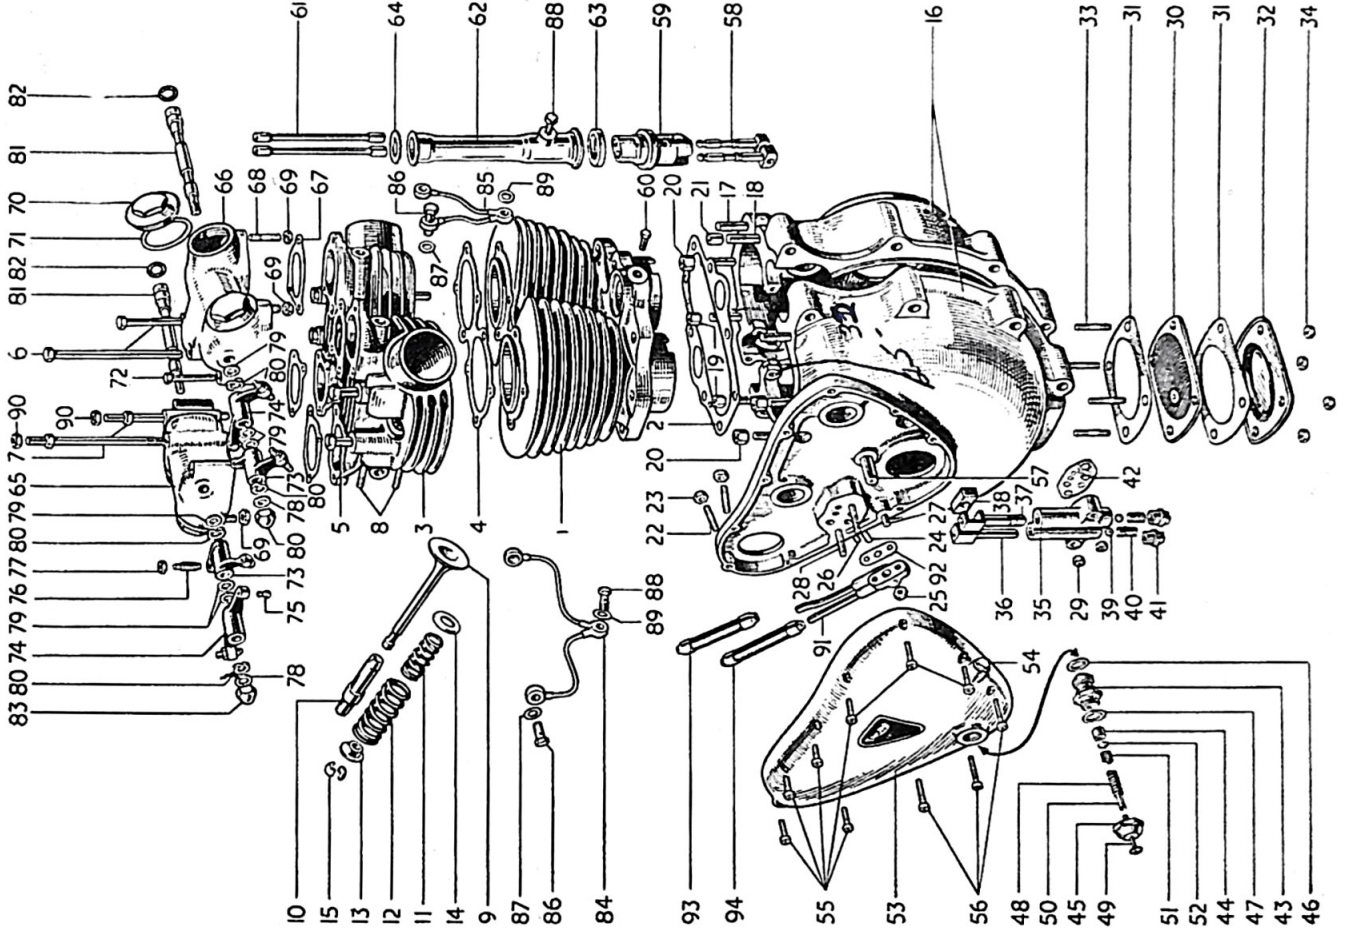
CRANKCASE, CYLINDER BLOCK, CYLINDER HEAD, etc.
